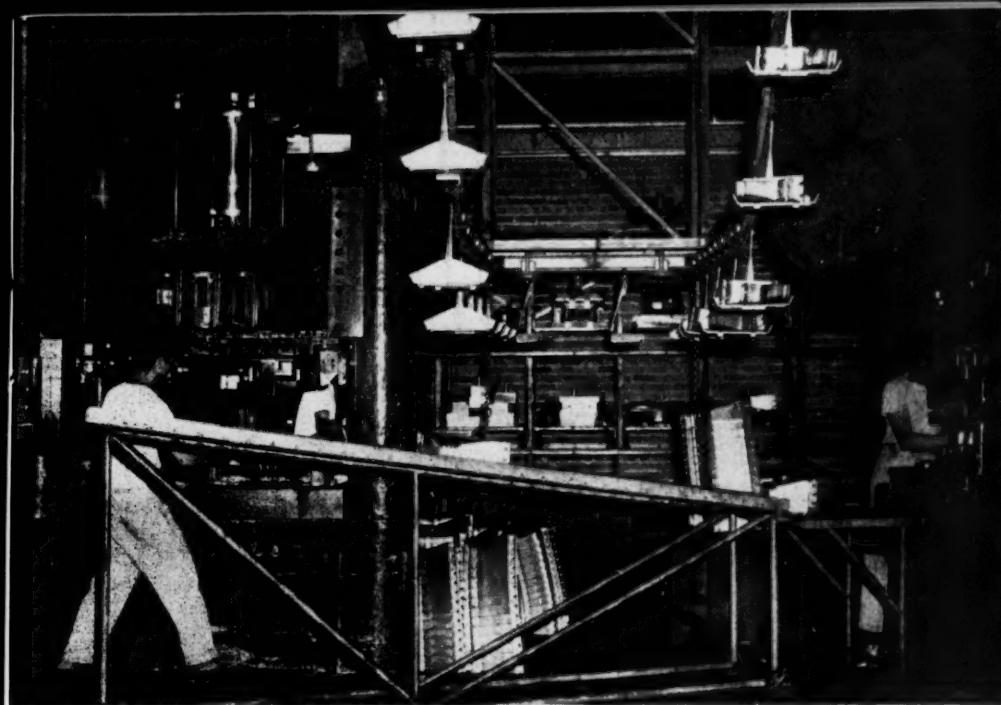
Parts from the second forming press (left) are moved by gravity conveyor to the parting and trim press (right) without a pause in the production cycle.
